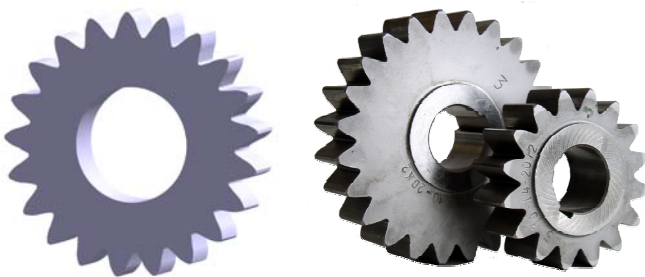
3D model and manufactured cylindrical gears with the convex-concave teeth profiles.
